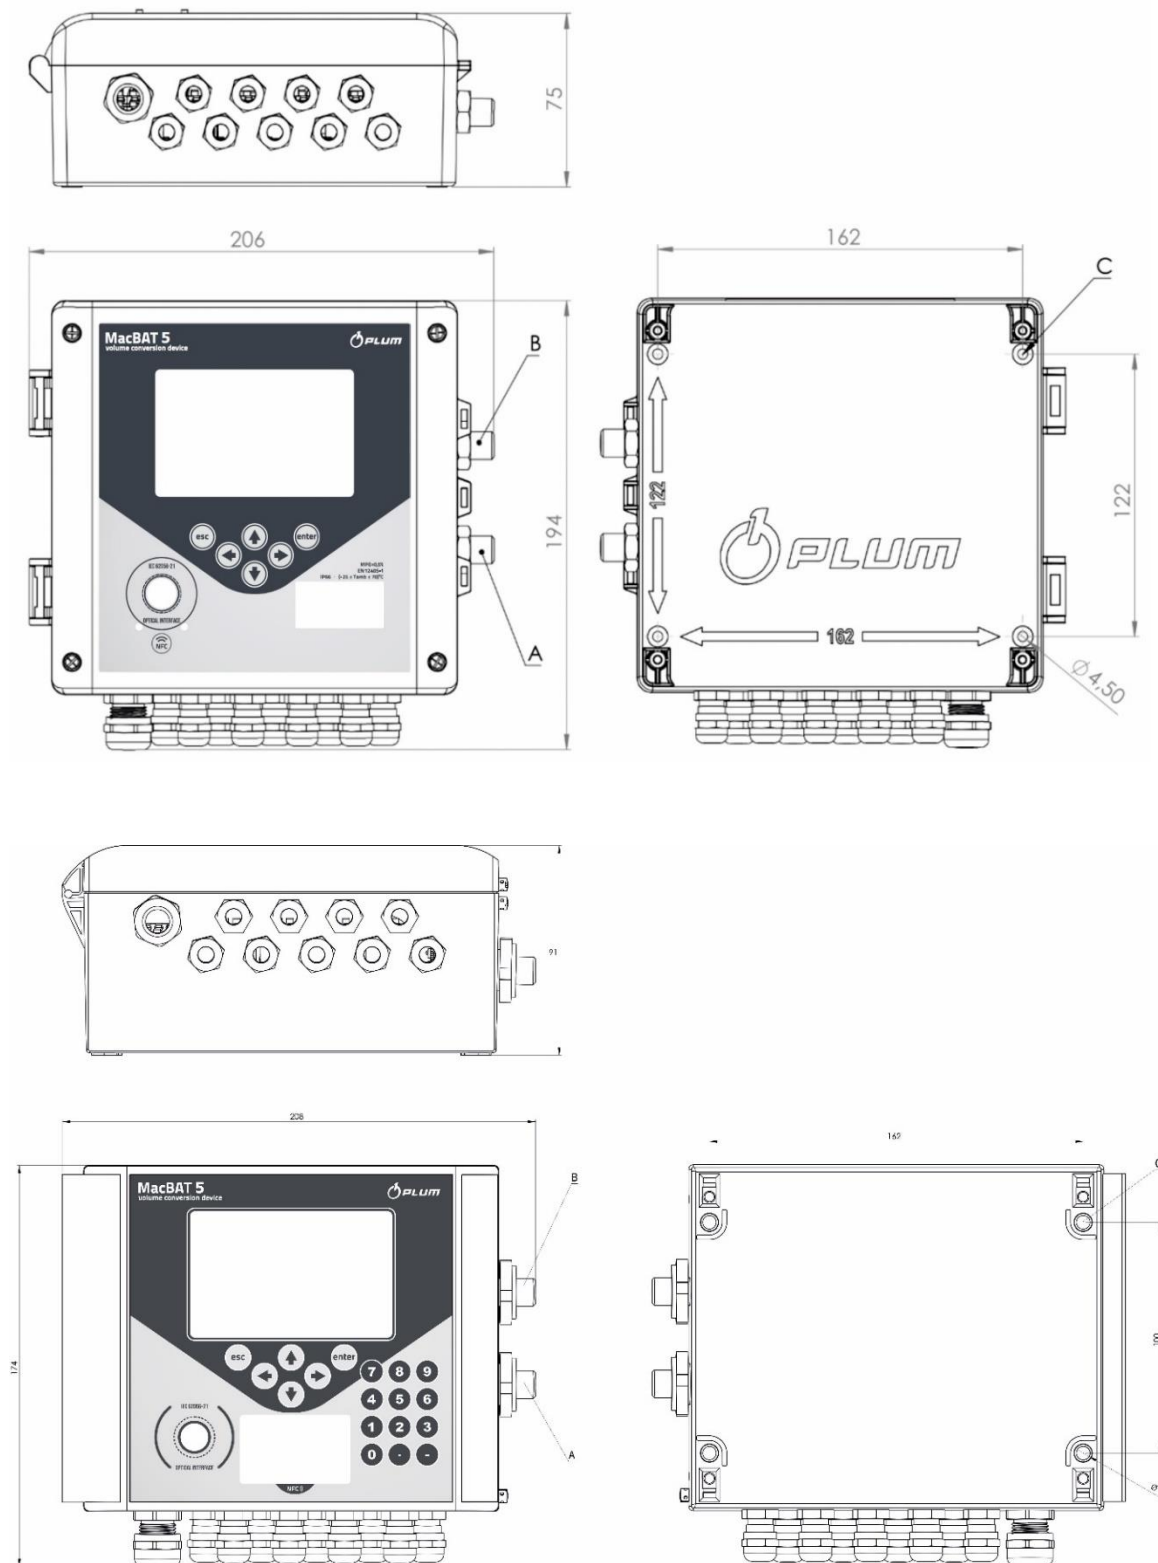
Building conditions and mounting holes locations in MacBAT 5 housing: A, B – pressure sensors, C – mounting plate
